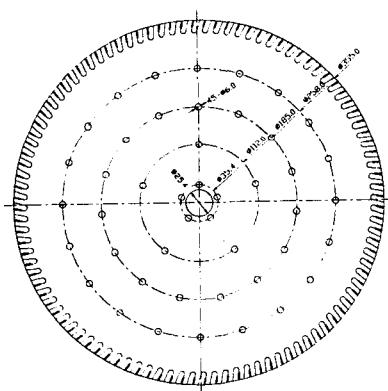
Multi-layer wood cutting saw blade with 45 points spot welding.
